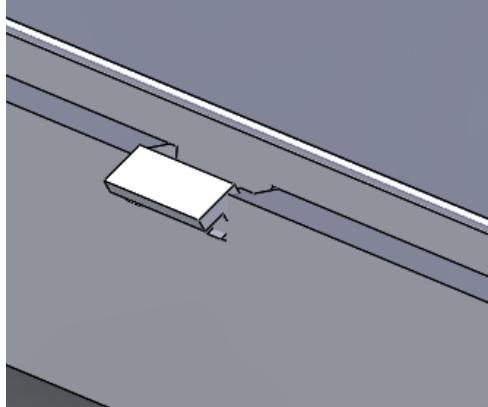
Mother Housing Lid latch (latched) (would bend in real life, not clip through Mother Housing)
